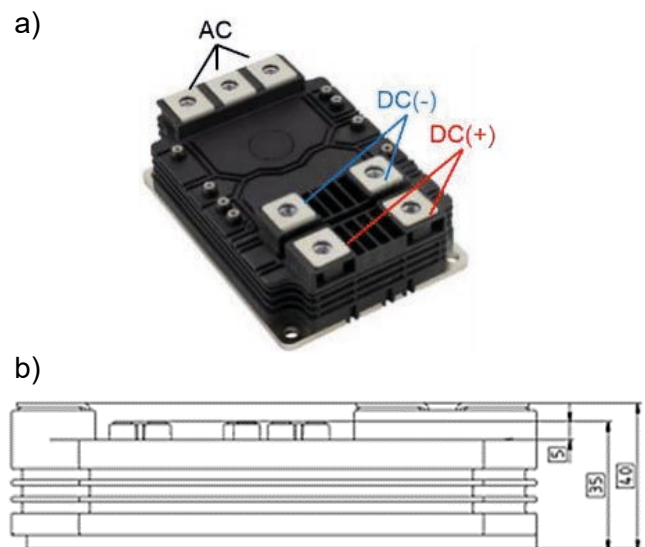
a) Typical appearance of XHP™ 2, and b) Aux terminal height for usage of a double-sided printed circuit board mounted on top of the module
